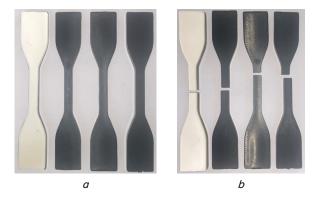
exhibits the tensile sample after injection molding and the tensile sample after tensile testing.
